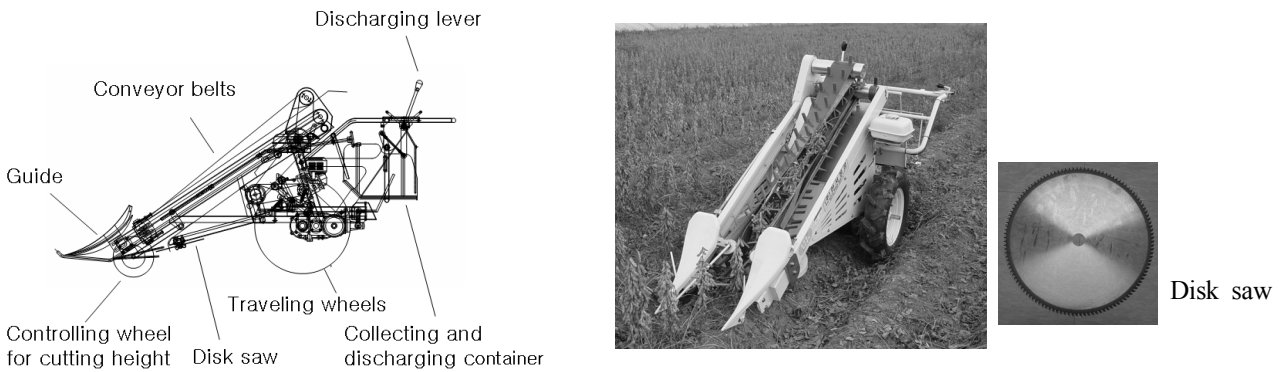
Views of prototype soybean cutter : drawing(left) and photo(right).
